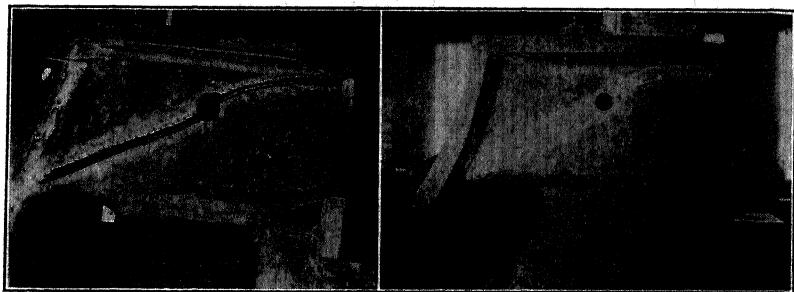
The 3-ft. crack in this cast iron locomotive cylinder was repaired by arc welding. The crack was vee'd out and studded as shown on the left.
